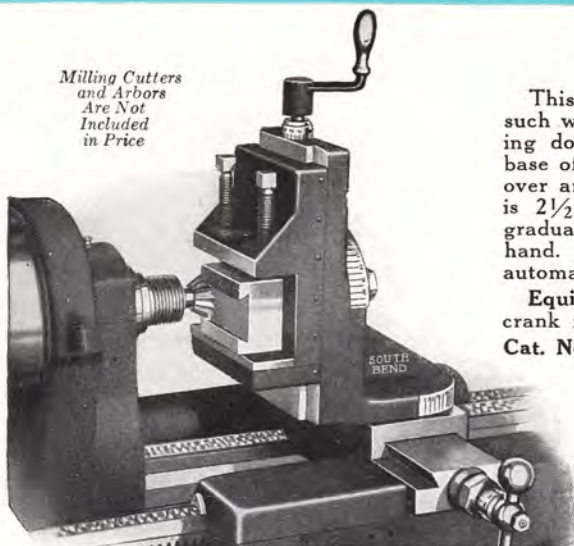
Milling a Dovetail Using the Milling Attachment.
